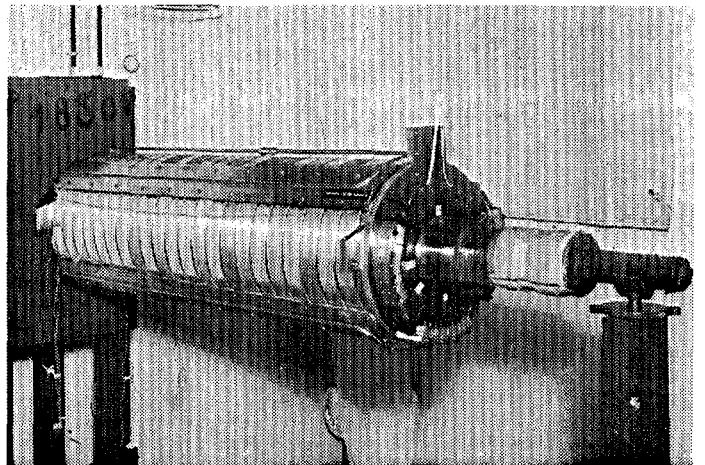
View of the assembled active part with inter-connections between pole windings and the LN-precooling jacket
